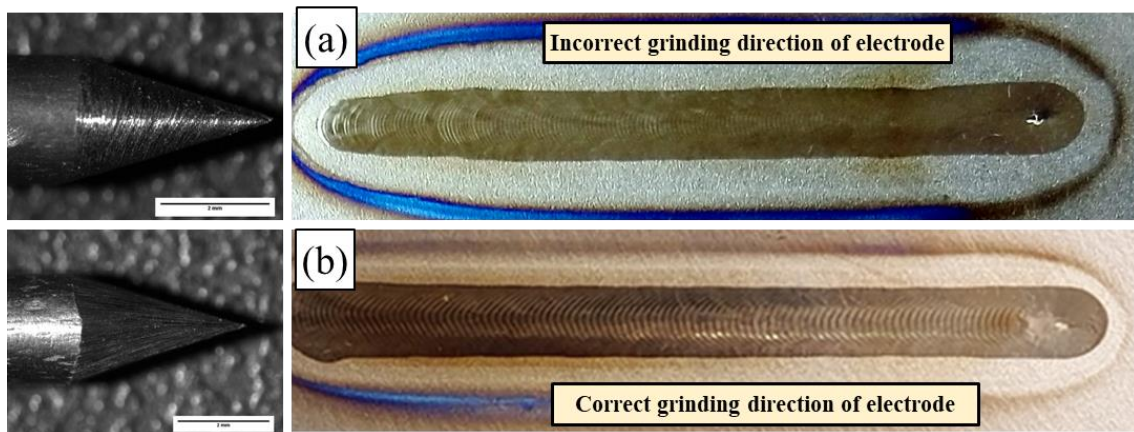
Weld bead appeared using different grinding direction electrode: (a) in the perpendicular to the length direction; (b) along the length direction
